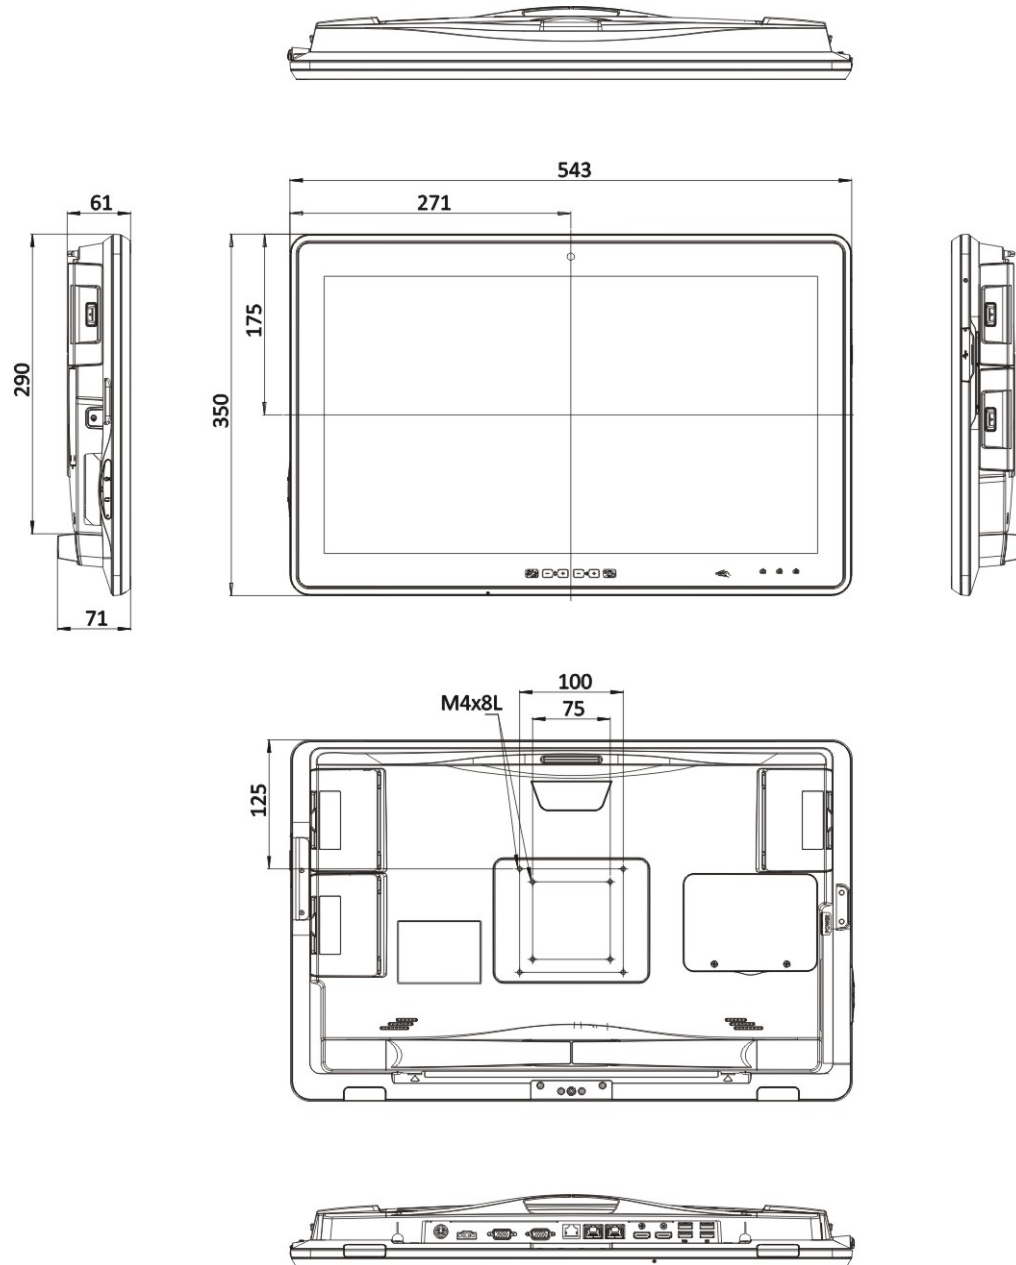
POCm-W22C-ULT3 Dimensions (mm)
